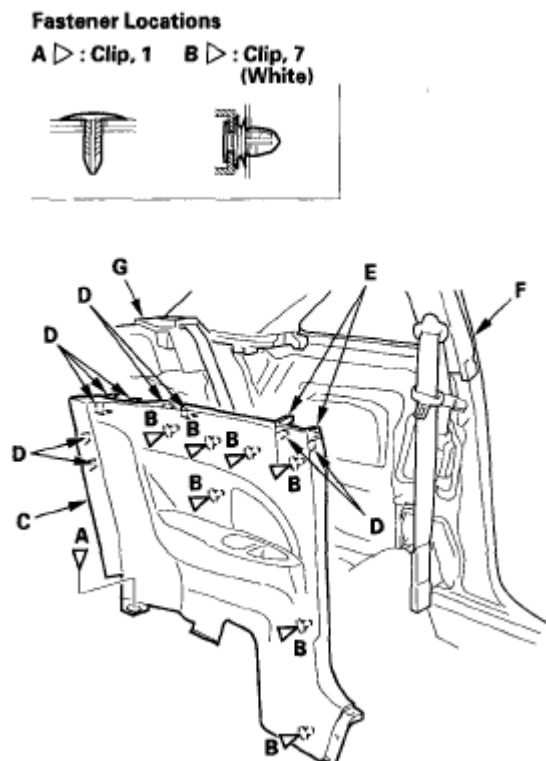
Detaching Clips By Pulling Rear Side Trim Panel Back
